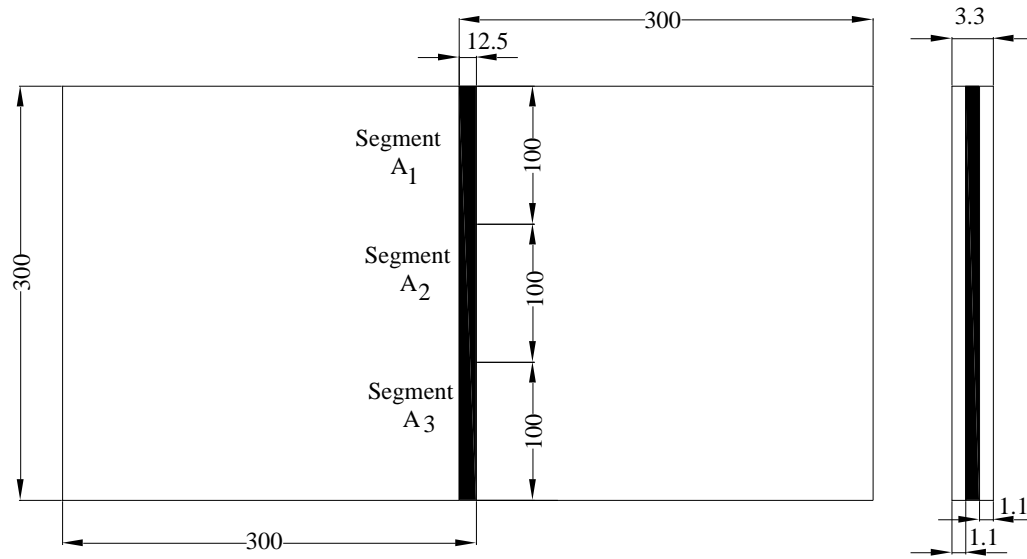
Geometric dimensions of plates with an adhesive lap joint (Case-1)
